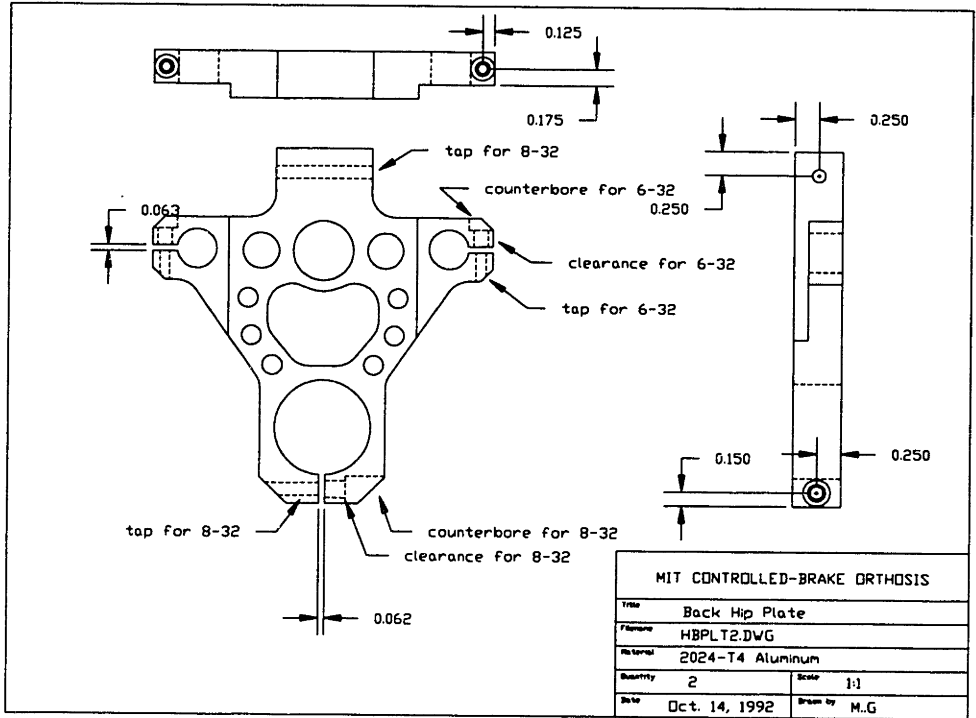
Back plate of hip gear housing (drawing 2 of 2).
